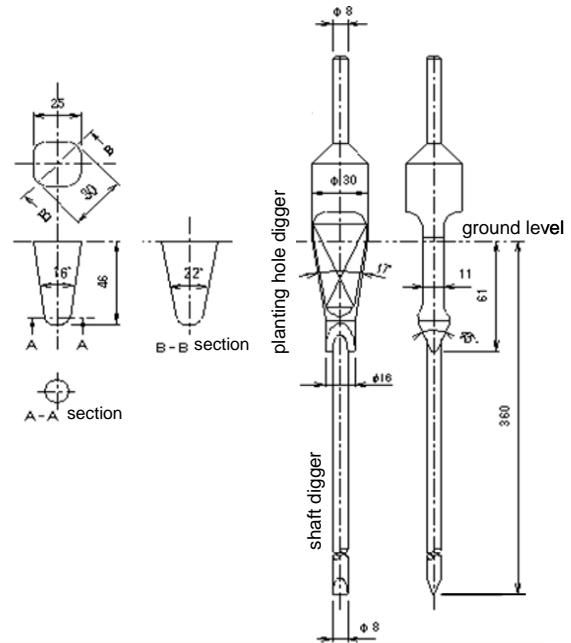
The Shaft Tillage tool and the shape of seedling.
